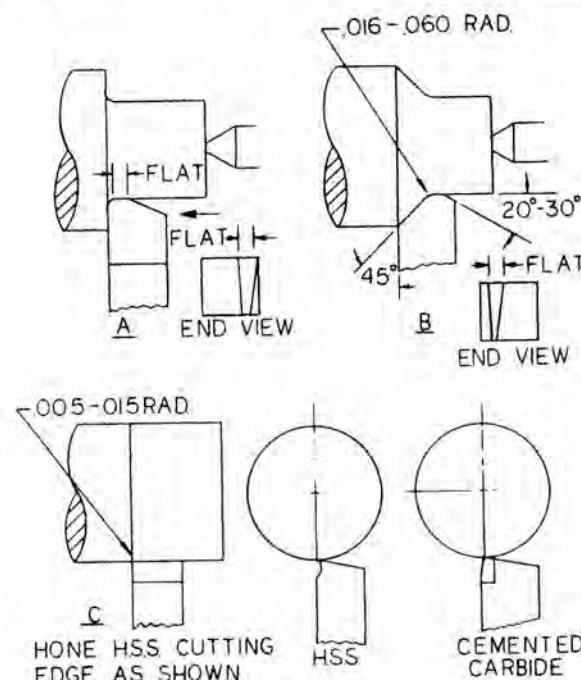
A. Combination rough- and finish-turning tool. B. Combination rough- and finish-turning tool with lead angle. C. Broadnose finishing tool.
